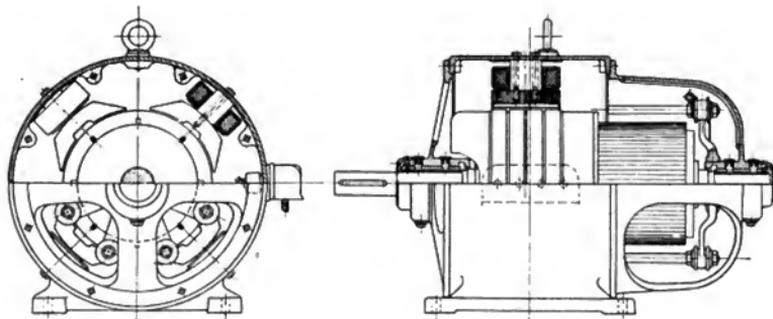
Sectional Elevation of a Series-Excited Rosenberg Generator Designed for Welding Purposes
